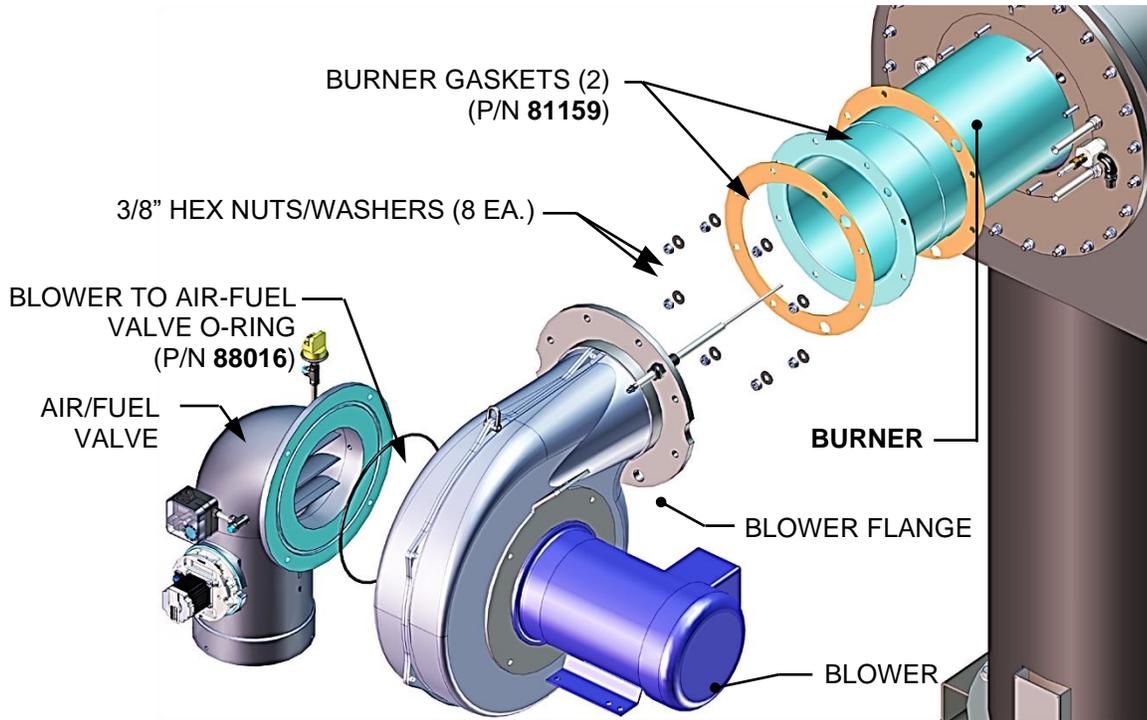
Burner Assembly Exploded View – BMK750/1000
